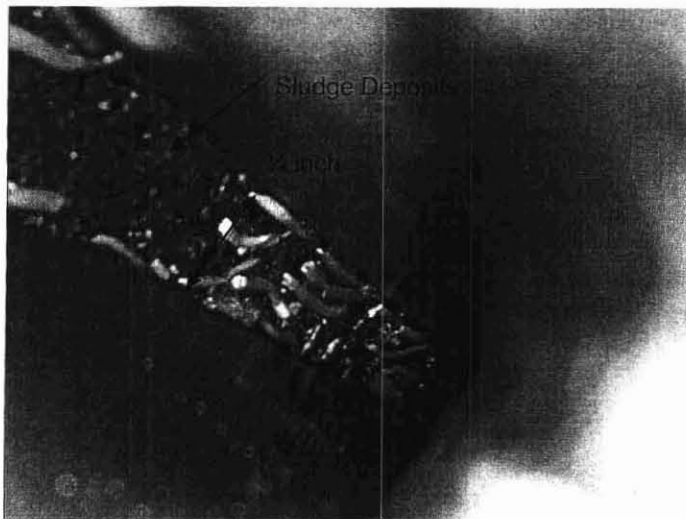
Uniform Sludge Deposits on Back of Impeller Blade
